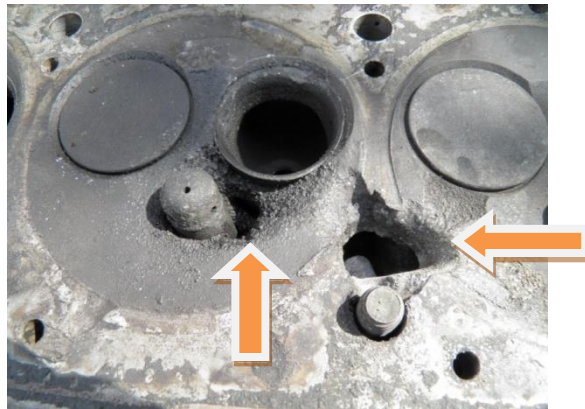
Melting of a diesel engine cylinder head due to overheating caused by sudden loss of coolant [35]
